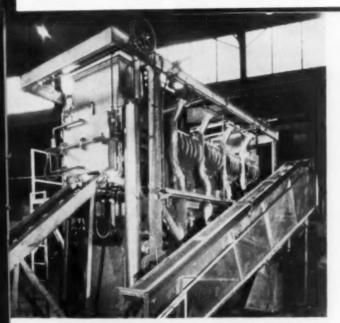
High speed furnace heats billets for forging automotive gears, discharges heated billets automatically on special chute.
